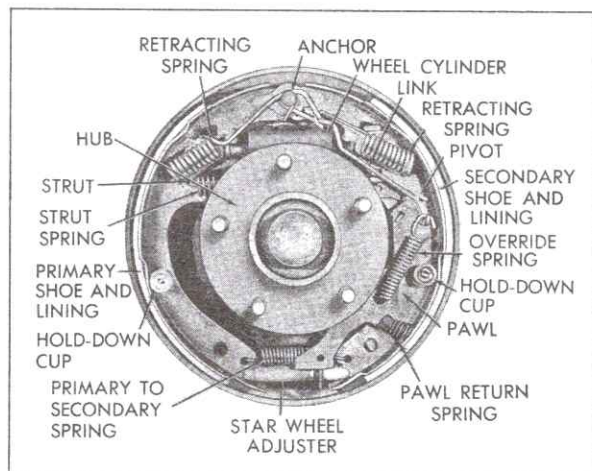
Rear Wheel Brake Mechanism (Left Side)
